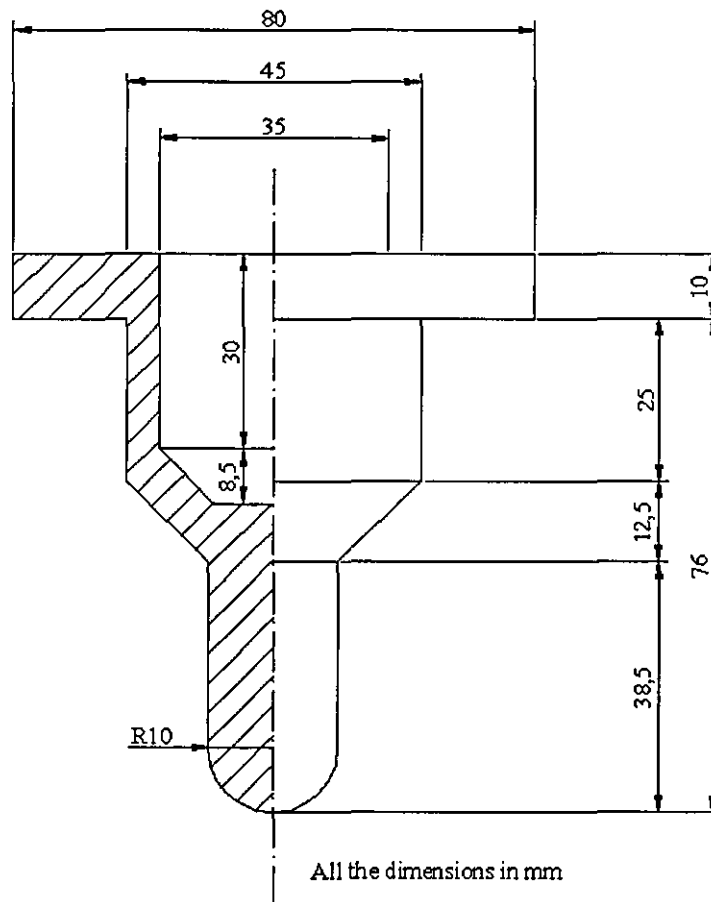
Impactor end-nose section and strain gauged load cell section dimensions, after modification
